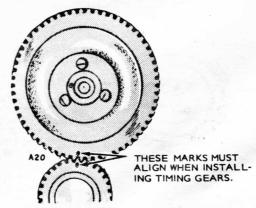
TIMING GEAR REMOVAL AND INSTALLATION
